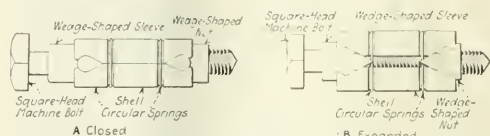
DOUBLE-SPREAD TYPE OF EXPANSION BOLT
